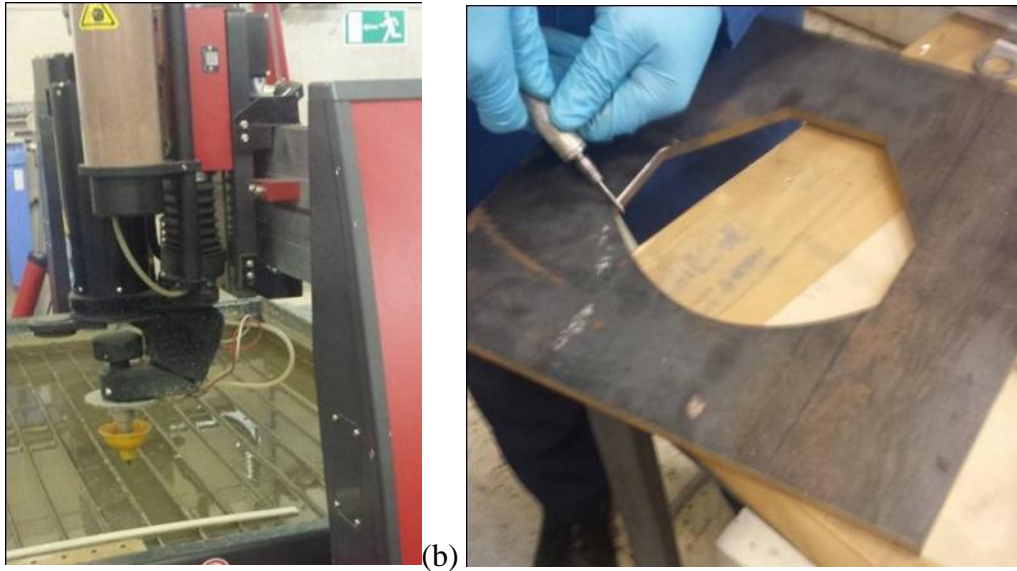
Manufacturing of backsupporting plate; (a) Water jet cutting, (b) Smoothing.
